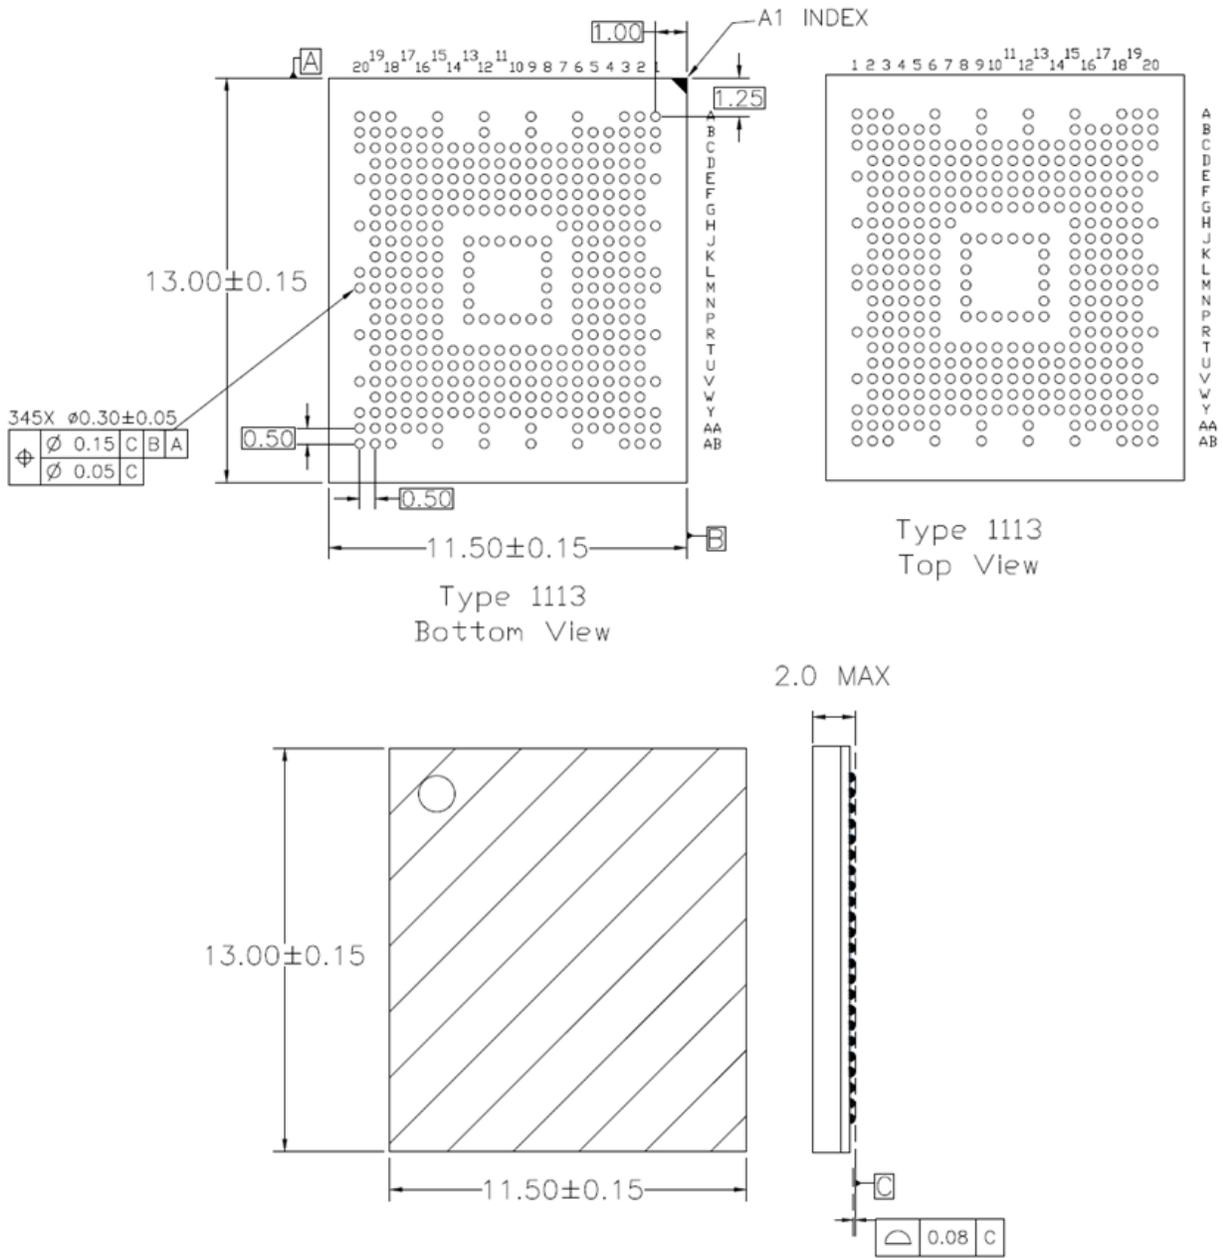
M.2 Type 1113-S5 Mechanical Outline Drawing Example
